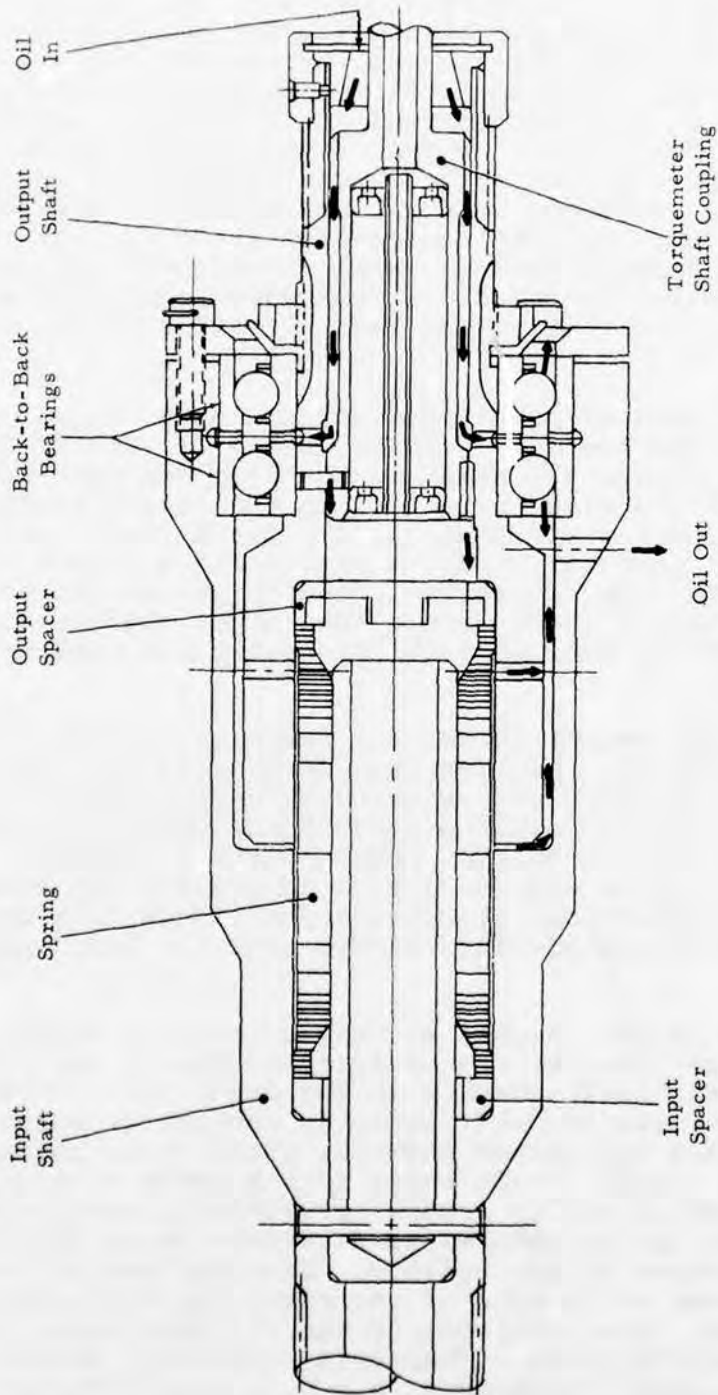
Initial Oil Flow Path Configuration in the Spring Clutch When Used on the Steam Turbine Test Rig.
